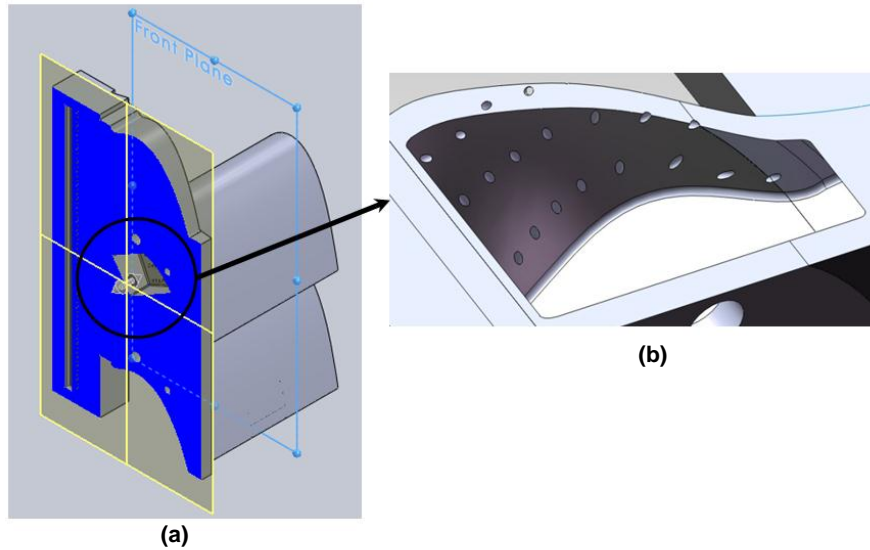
Discrete hole coolant cavity (a) section plane, (b) coolant cavity inside view
